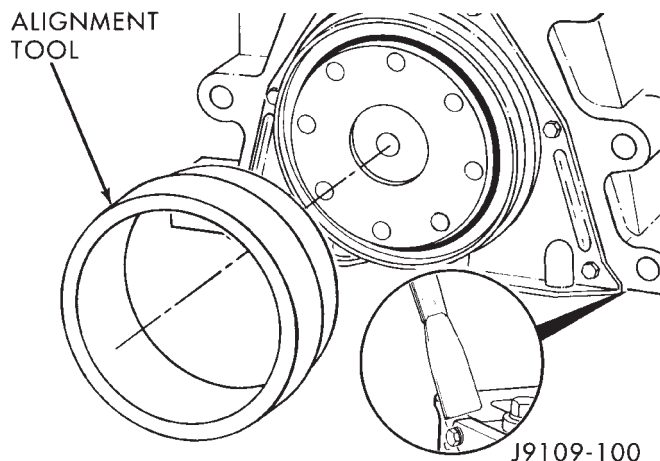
Crankshaft Rear Seal Housing Alignment Tool
